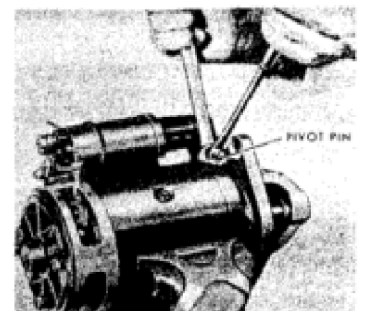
Adjusting drive pinion clearance on diesel engine starting motor.
